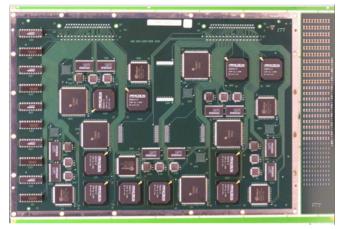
Test vehicle with both plated through hole (PTH) and surface mount technology (SMT) [Copyright SMTA]
